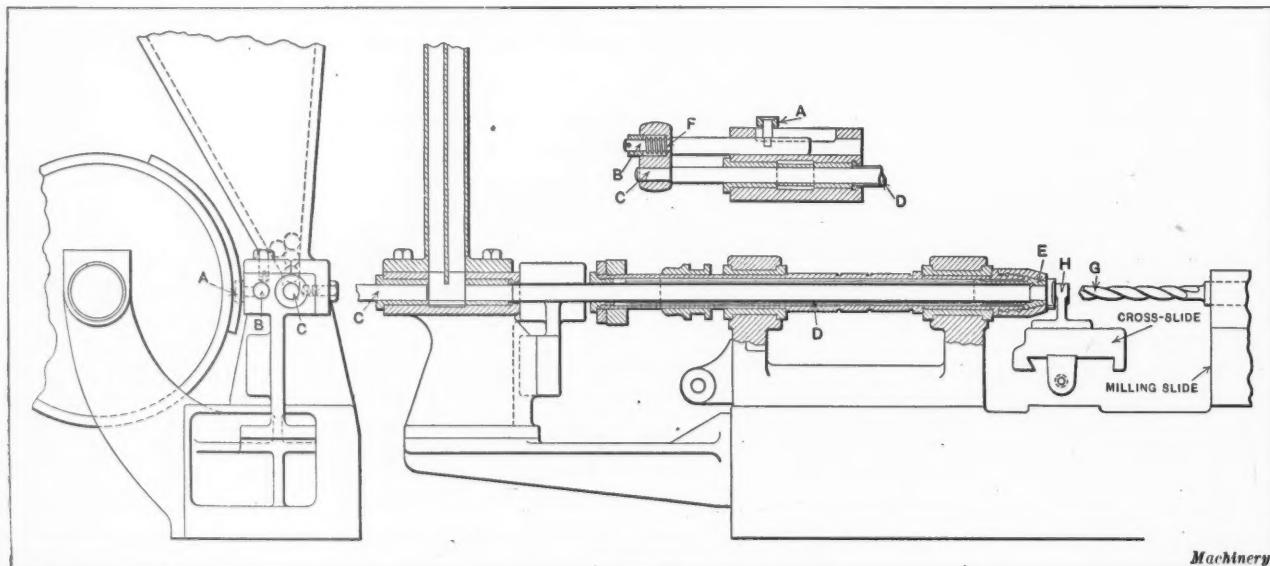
Mechanism of Feeding Magazine shown on the Machine in Fig. 1. This Magazine is mounted at the Left of the Spindle Head, and a Cam-operated Plunger pushes Blanks through a Delivery Tube to the Chuck
